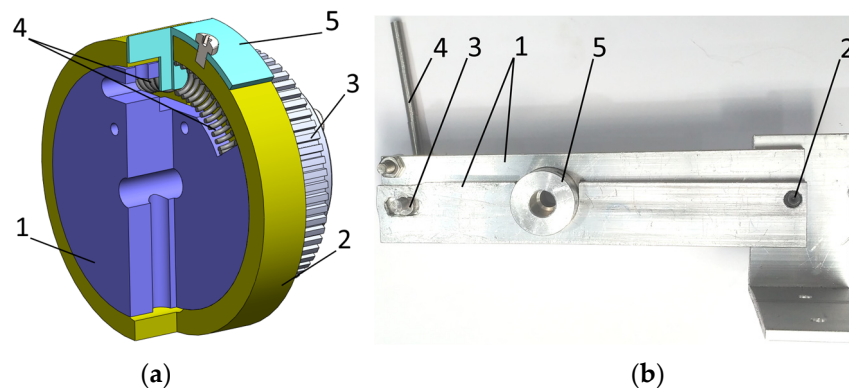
Haptic device elements: (a) step-to-torque-transforming bushing: 1 inner drum, 2 outer drum, 3 pulley, 4 springs, 5 partition; (b) the clamping mechanism: 1 aluminum strips, 2 axle, 3 eccentric, 4 handle, 5 bushing of the joint.
